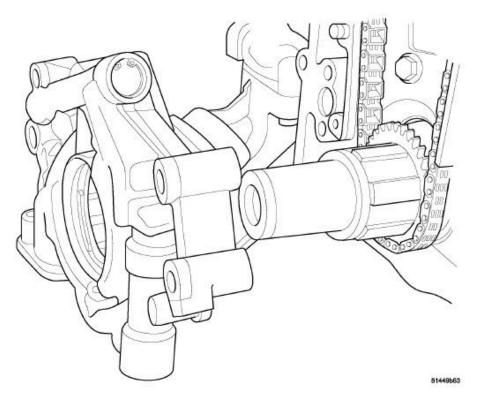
OIL PUMP REMOVAL/INSTALLATION Courtesy of CHRYSLER LLC
